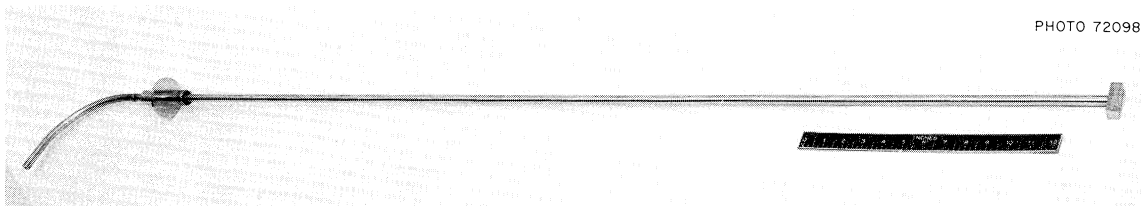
MSRE Fuel Storage Tank Ultrasonic Level Probe Assembly.
